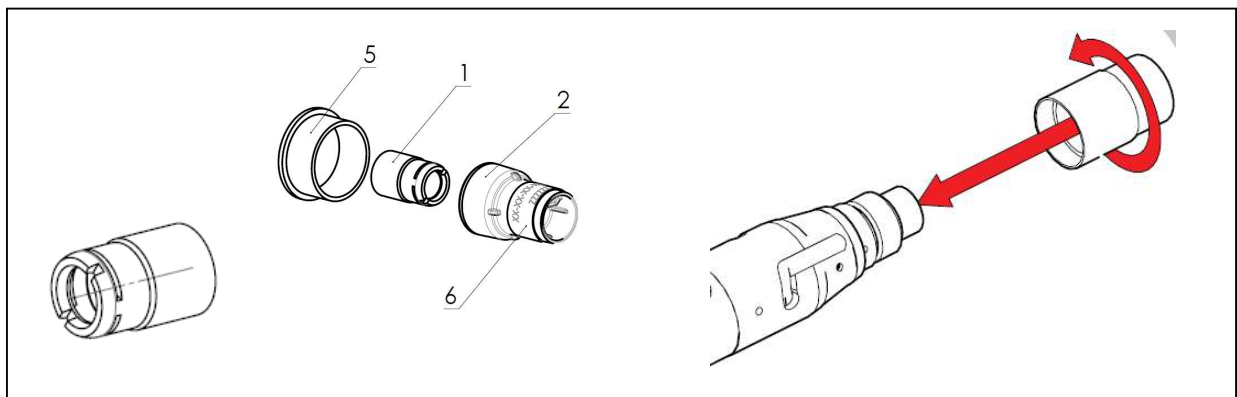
LLK-Q Window Assembly and Packaging
